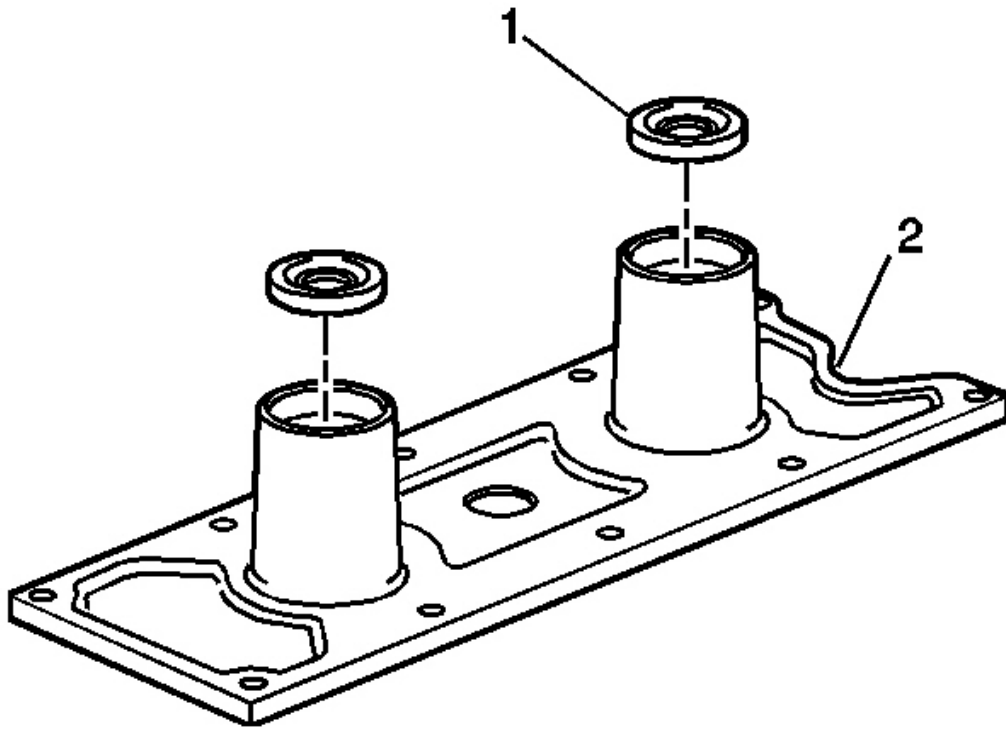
View Of Knock Sensor Oil Seals & Cover
